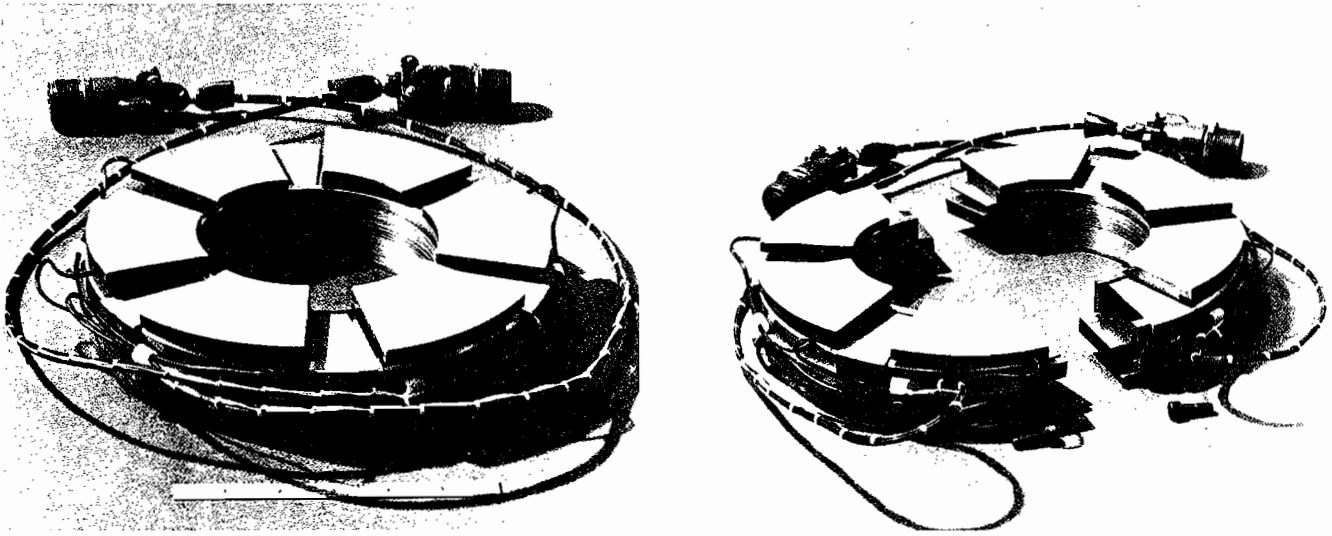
Oil Lubricated Tilting Pad Equalized Thrust Bearing for Steam Turbine Operating at 10,000 rpm.
